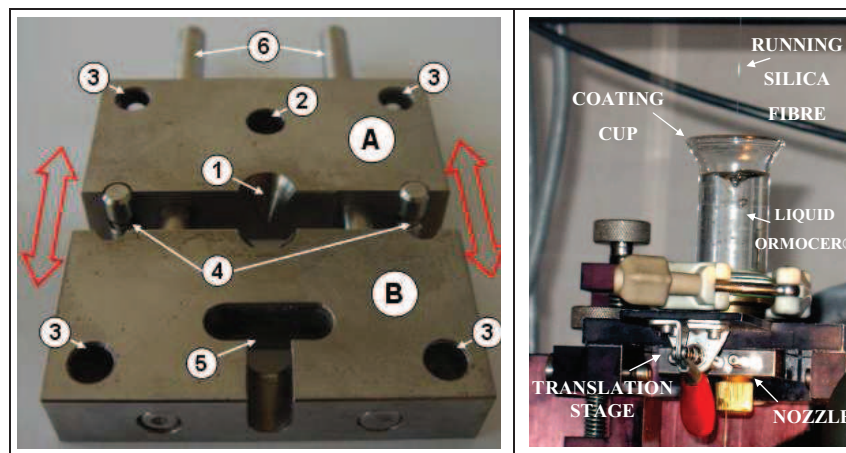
Metal coating nozzle with two identical parts well aligned and which fit exact together (left), complete coating applicator with cup, nozzle and mechanical translation stage (right).
